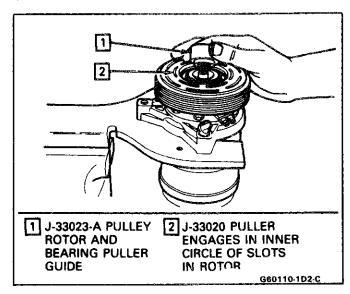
Installing Pulley Rotor/Bearing Puller Guide
